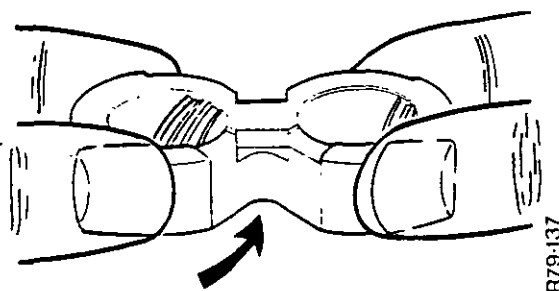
REMOVING MARKS FROM THE FACES OF THE BEARINGS
